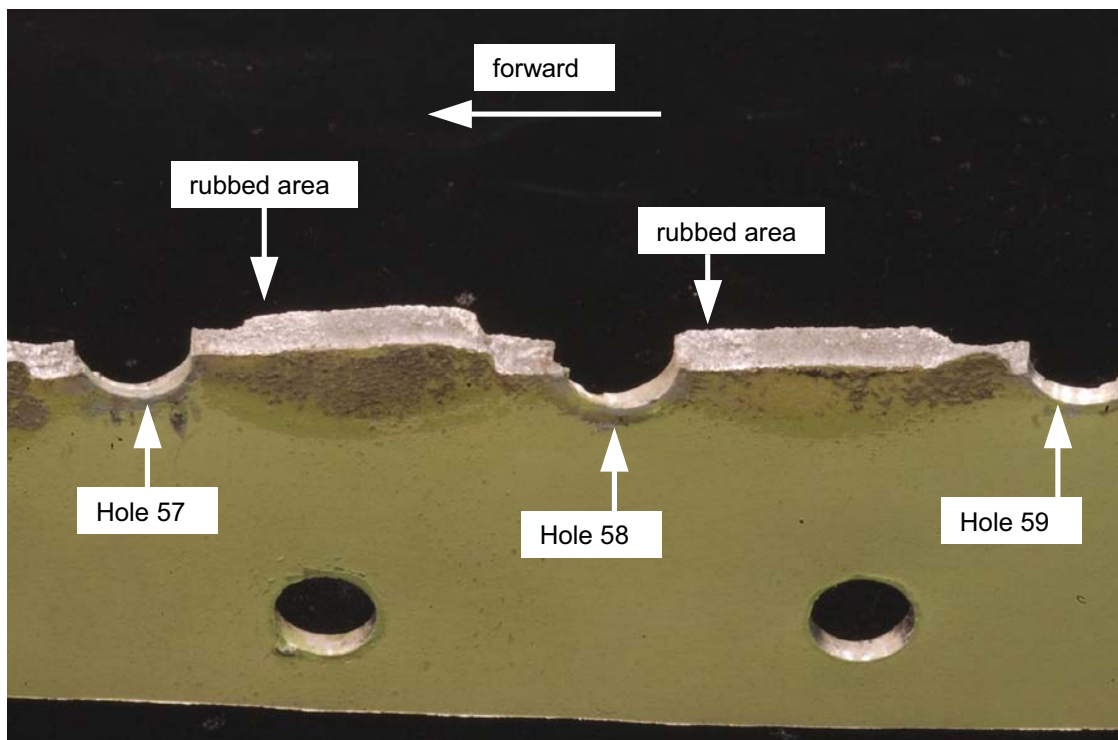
, Photograph of the fracture surface at Holes 57, 58, and 59. The shiny areas are indicative of rubbing with the mating fracture surface and appeared consistently forward of this area, but were not present aftward beyond Hole 62.
